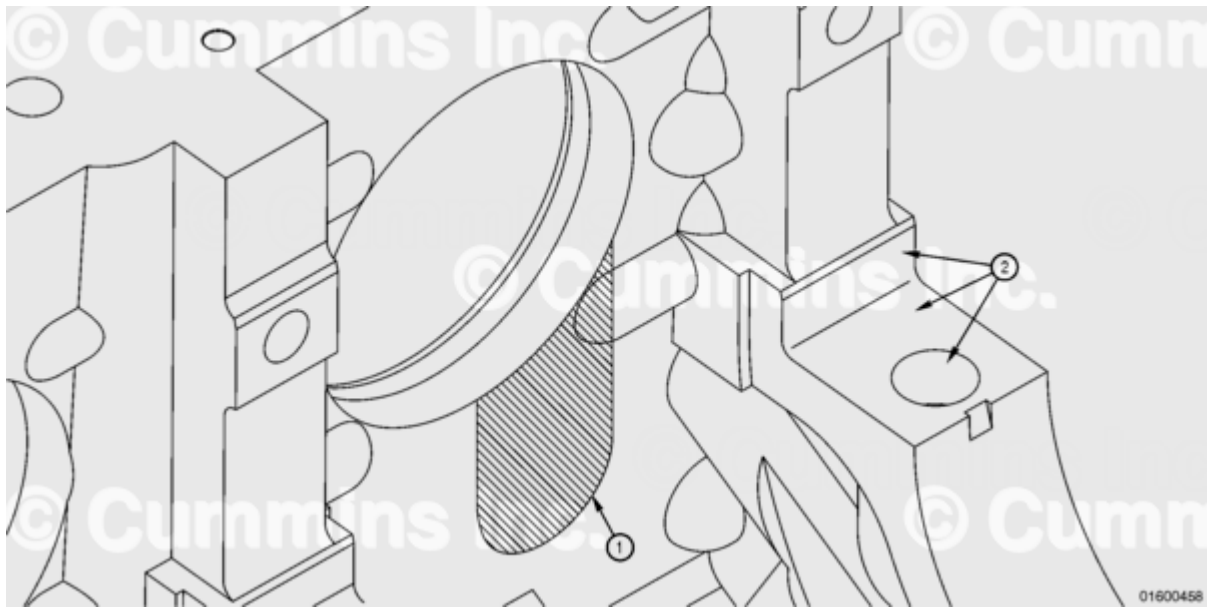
Sidewall Machining (1) Sidewall, (2) Datums used for machining.
